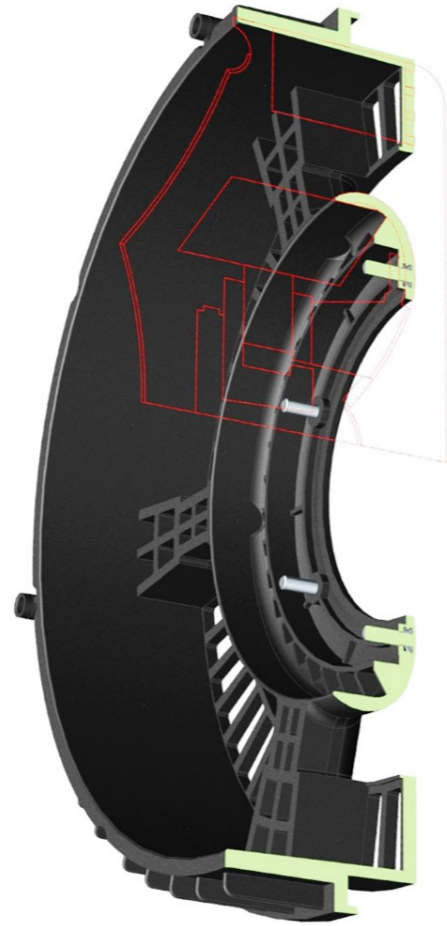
Image showing section of the final acoustic simulation geometry in red, and the resulting mechanical CAD design used for the Uni-Q housing tooling
